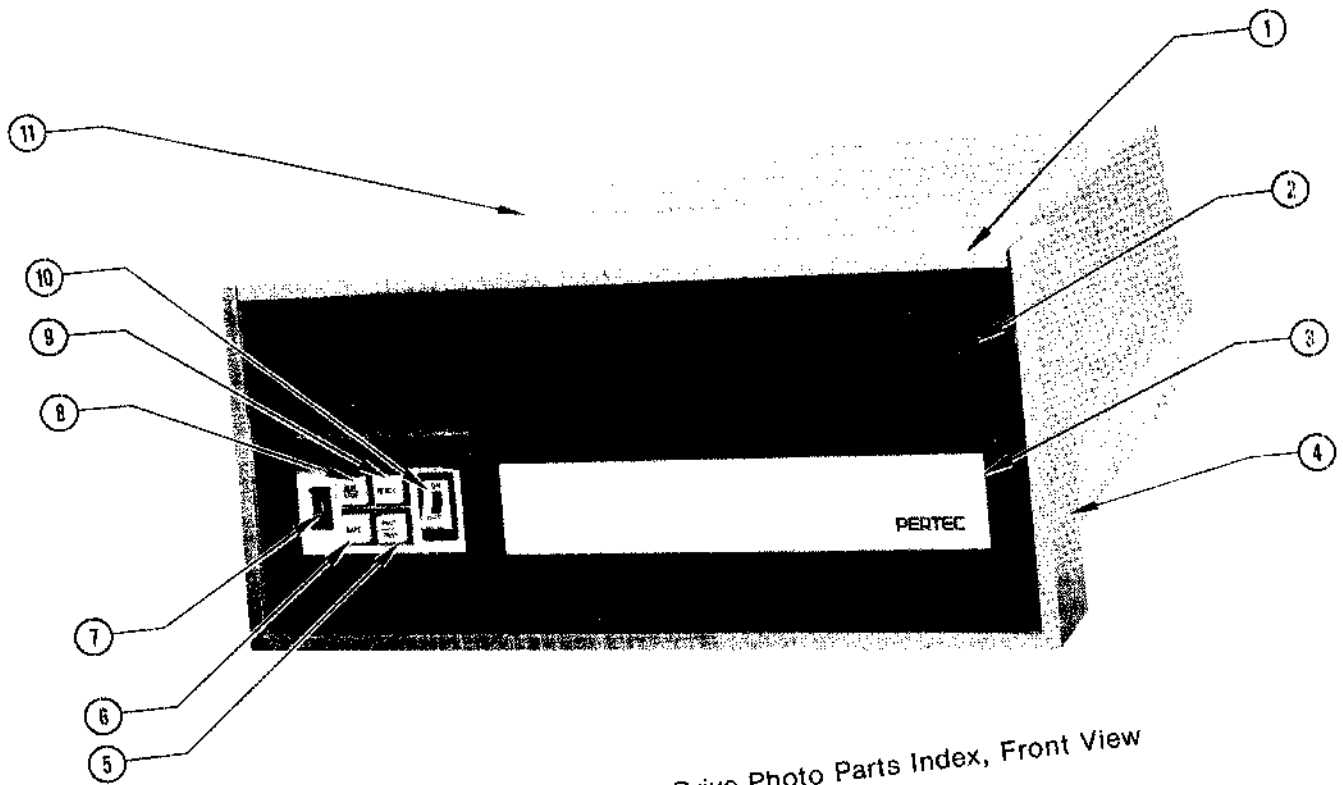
D3000 Disk Drive Photo Parts Index, Front View
